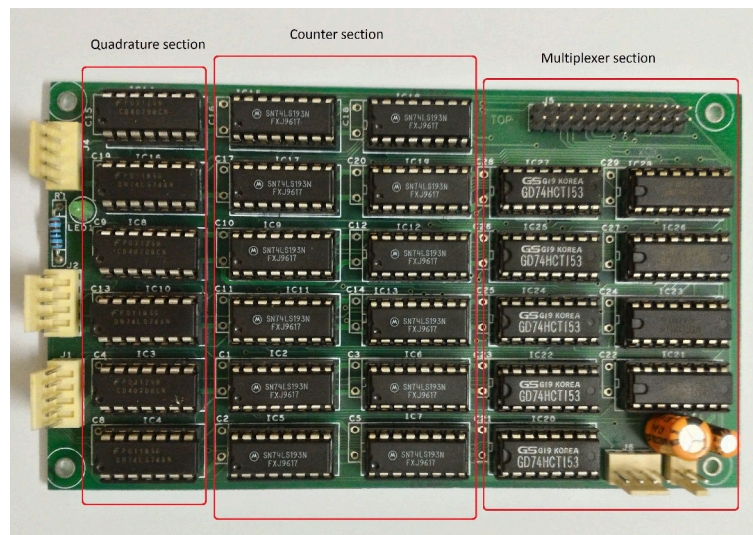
Encoder processor and multiplexer PCB board. Three sections of the board are quadrature section, counter section and the multiplexer section.
